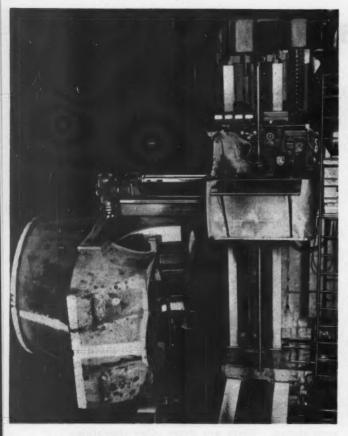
Various surfaces on odd-shaped work-pieces can be machined without resetting the work by equipping horizontal boring mill headstock with an underarm support and angular milling attachment.
